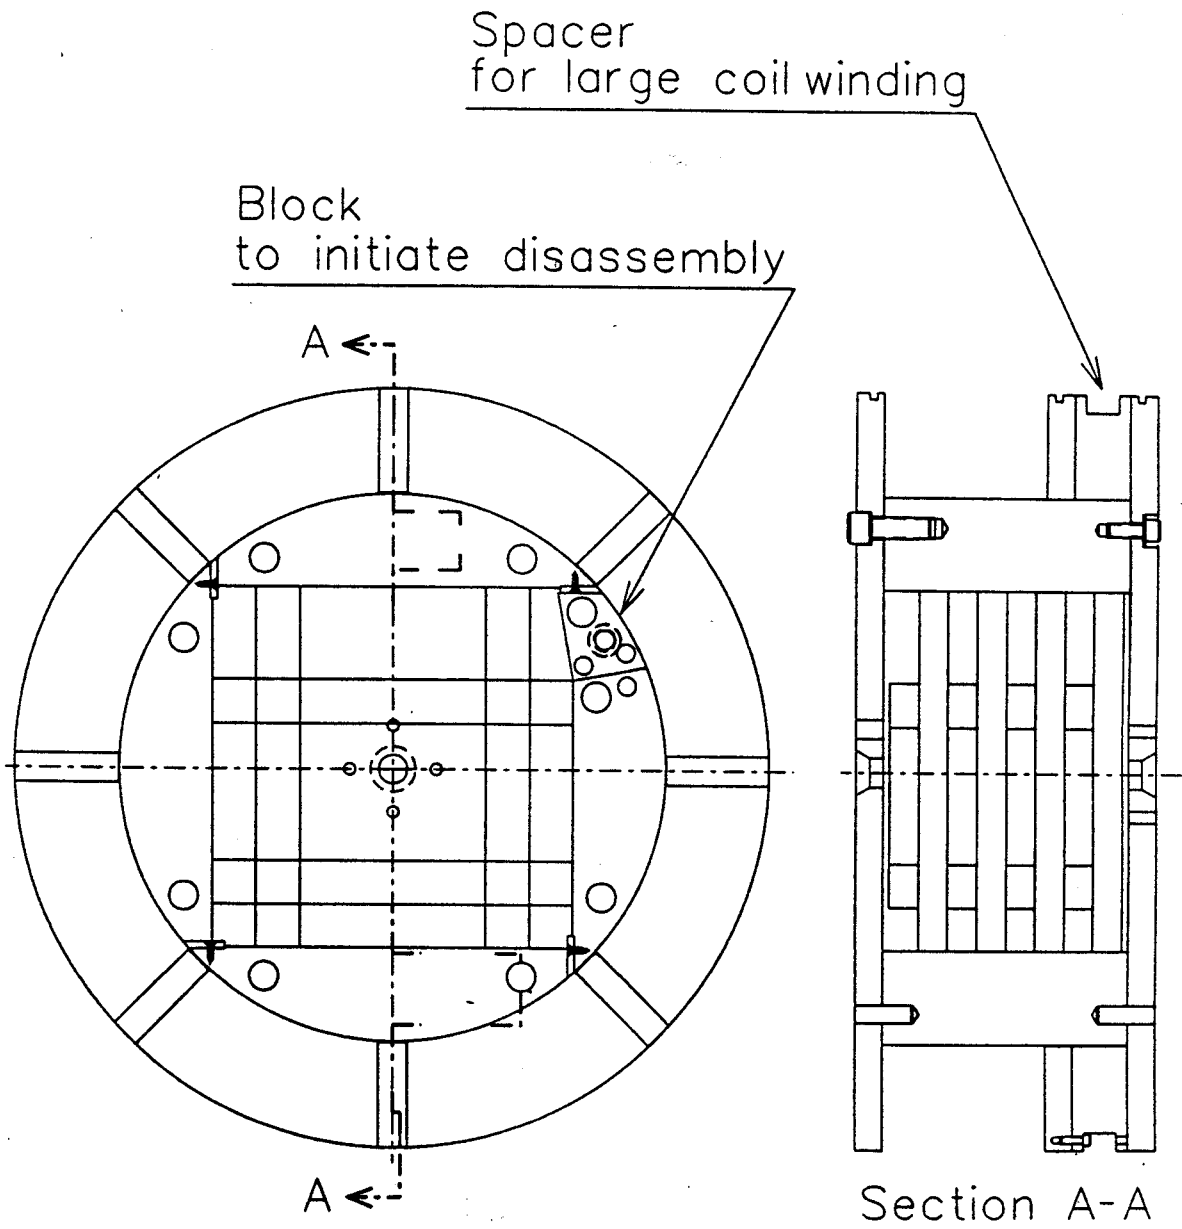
A removable winding form used for the 8 tesla coil construction to ensure removal of the coils from the bore tube.
